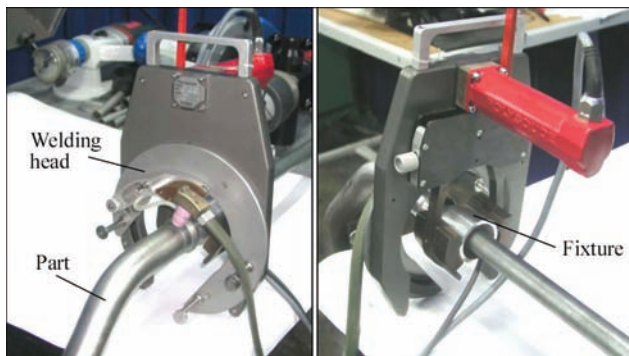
Fixing of closed type welding head to special fixture
